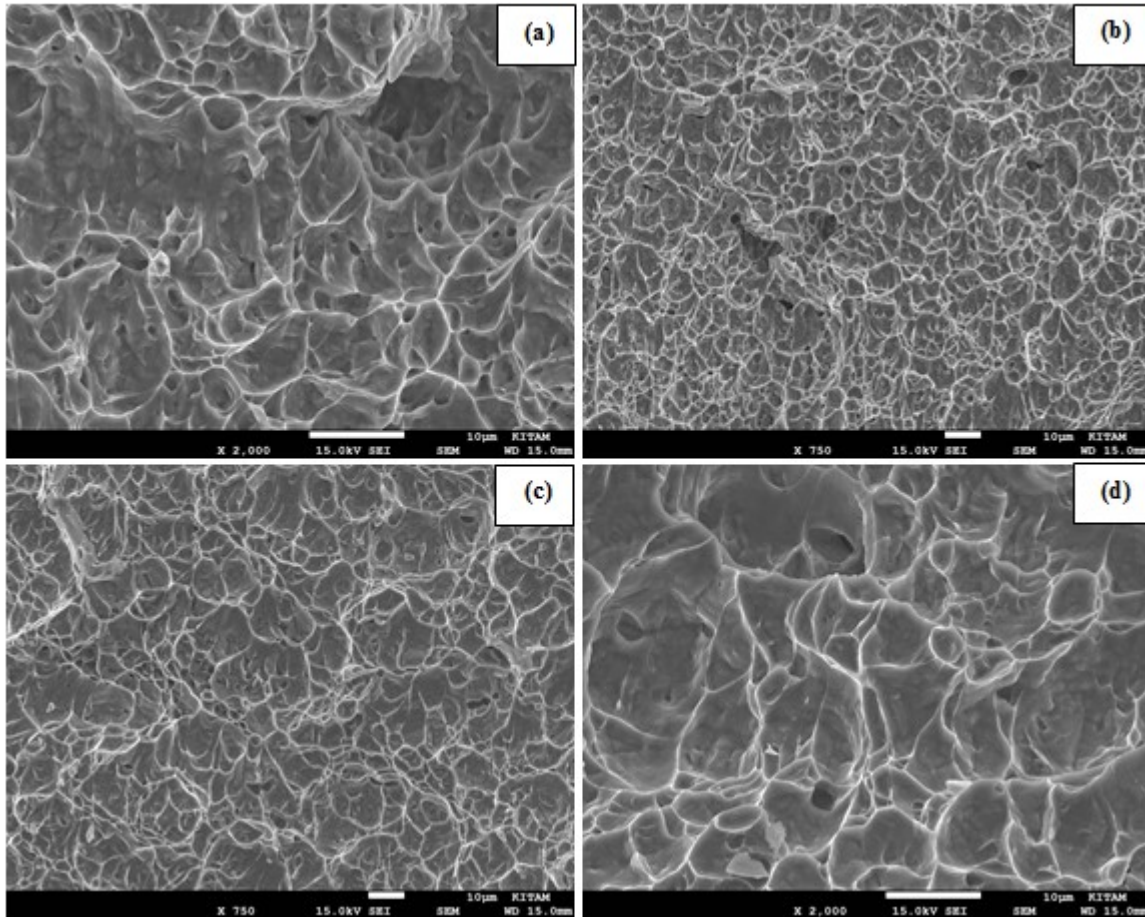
Fracture surface images of base metal and laser welded samples after the tensile test, (a) Sample A, (b) Sample B, (c) Sample A1, (d) Sample B1
